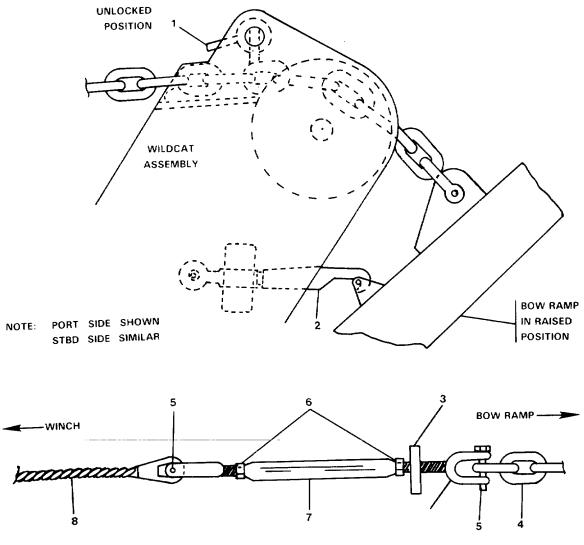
Turnbuckle, Chain Stopper and Locking Assemblies.
